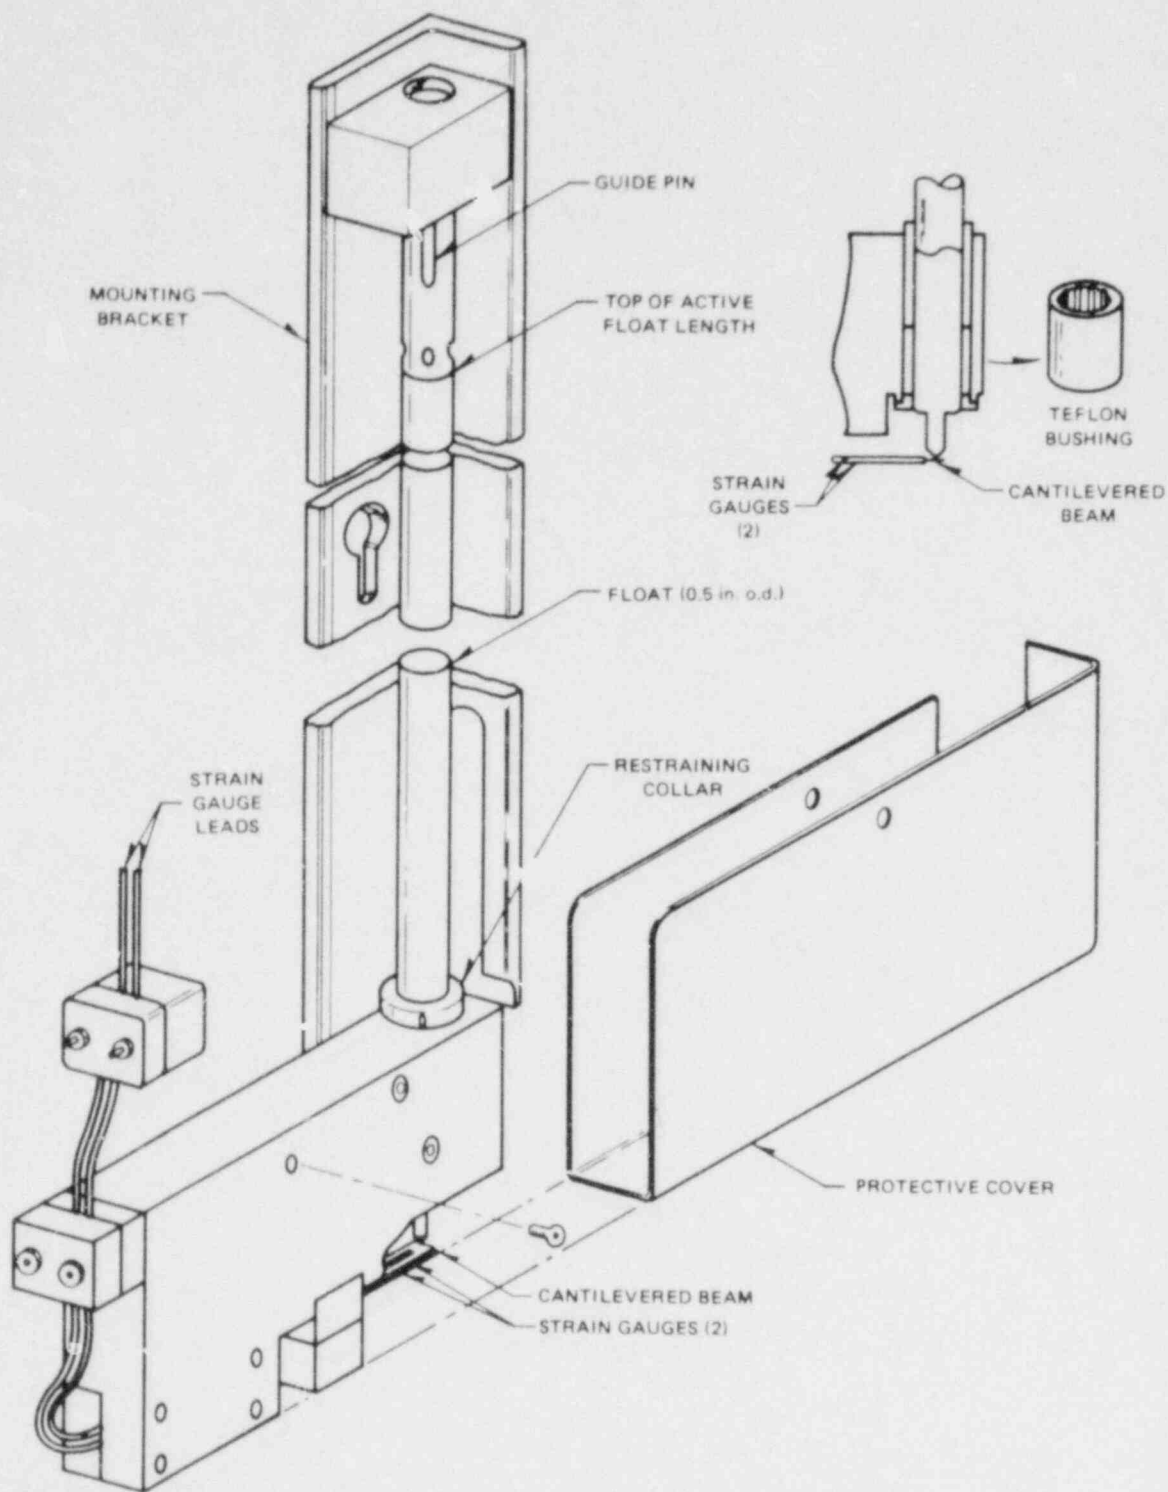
Sketch of Modified Buoyant Float Instrument Construction
